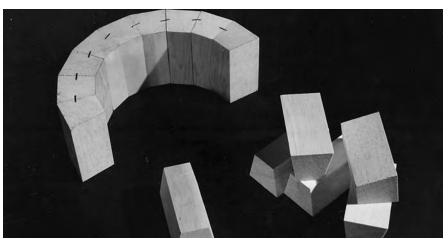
Small segments can be assembled this way, using glue and a stapling gun. A band clamp or rubber bands can be used to hold the pieces until the glue dries.
